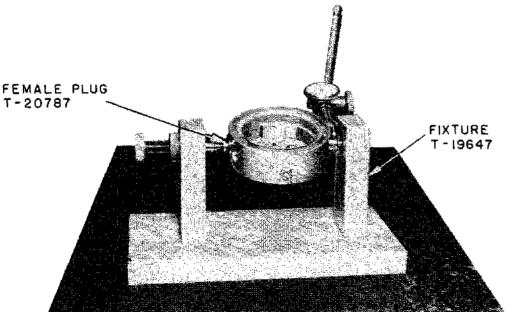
CHECKING THE CONCENTRICITY OF THE AIR PIVOT IN THE ROTOR HOUSING. TOLERANCE, .0005 INCH.
